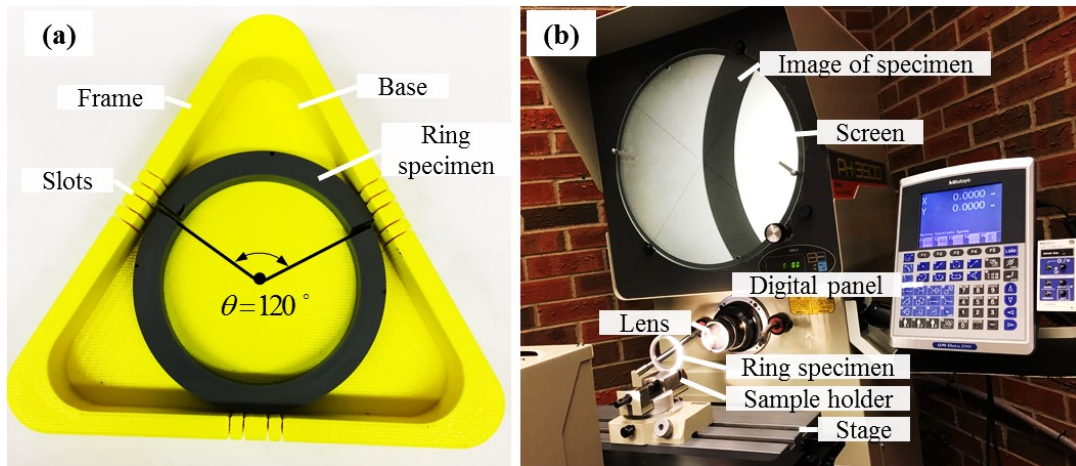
(a) 3D-printed mold and (b) set-up of the Optical Comparator for measurement of outer diameter change
